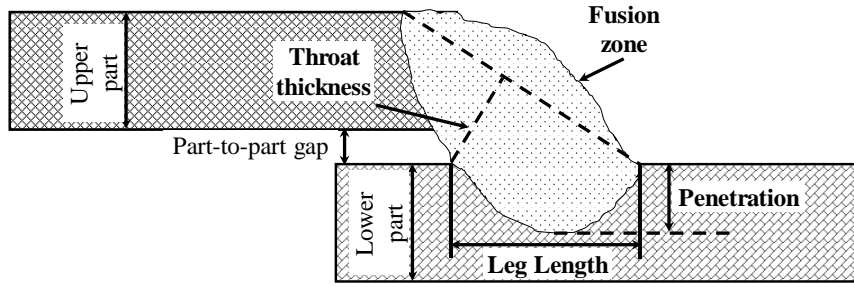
Key geometrical features of part-to-part gap-bridged RLW fillet edge weld [14, 40].
